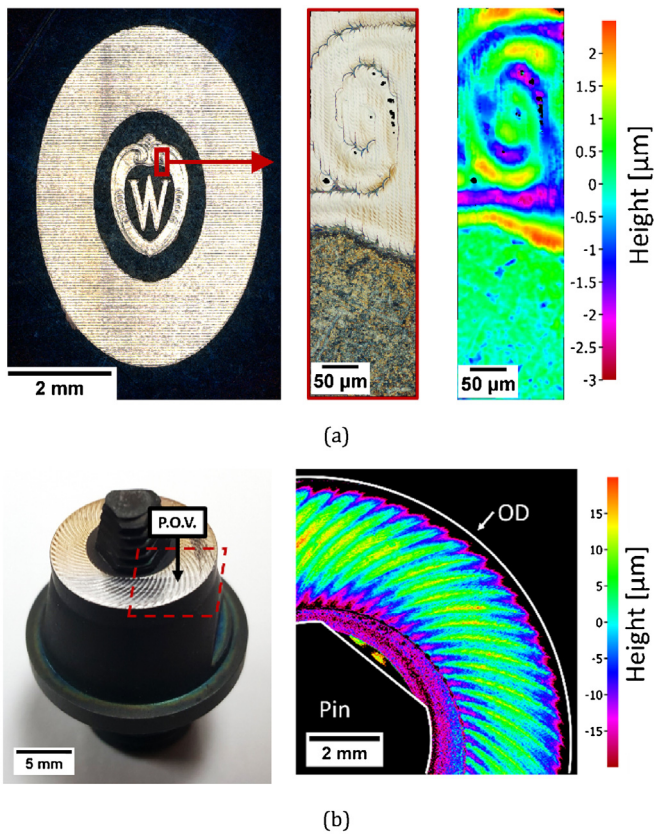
Examples of pulsed laser micro structuring (PLμS): (a) a decorative application with micro-scale features (430 stainless steel), and (b) an engineered surface (H13 tool steel) on the shoulder of a friction stir welding (FSW) tool.
